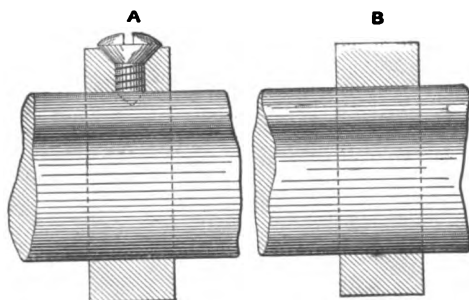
Collars. *A*, collar fastened to shaft with a set-screw; *B*, collar fastened to shaft by shrinking.
